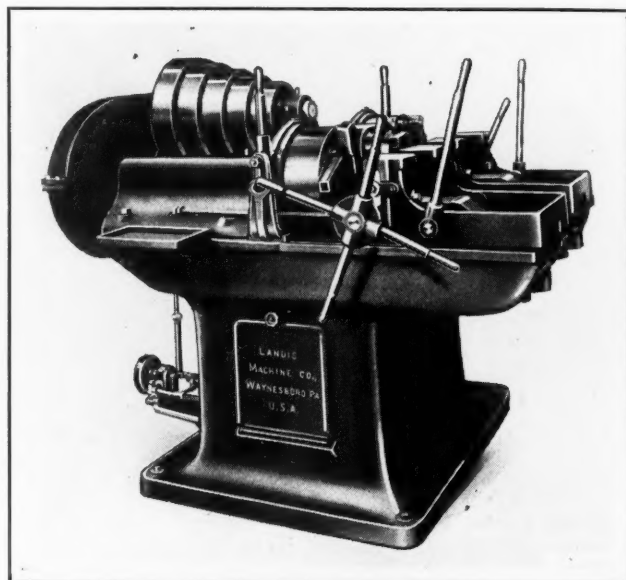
Landis Pipe and Nipple Threading Machine with Internally Tripped Die-head
